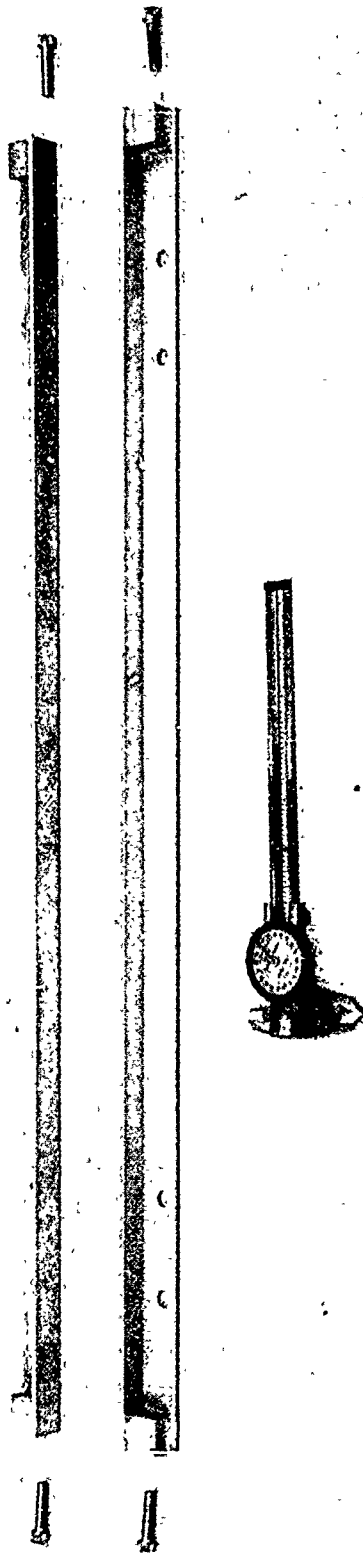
Rails for mounting equipment shelves inside 20-inch-diameter ceramic housing.
